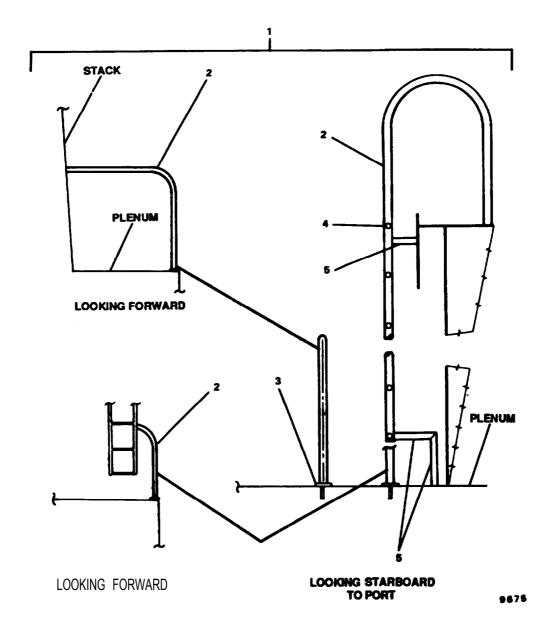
Pilothouse Top Ladders and Handrails (Sheet 2 of 4).
